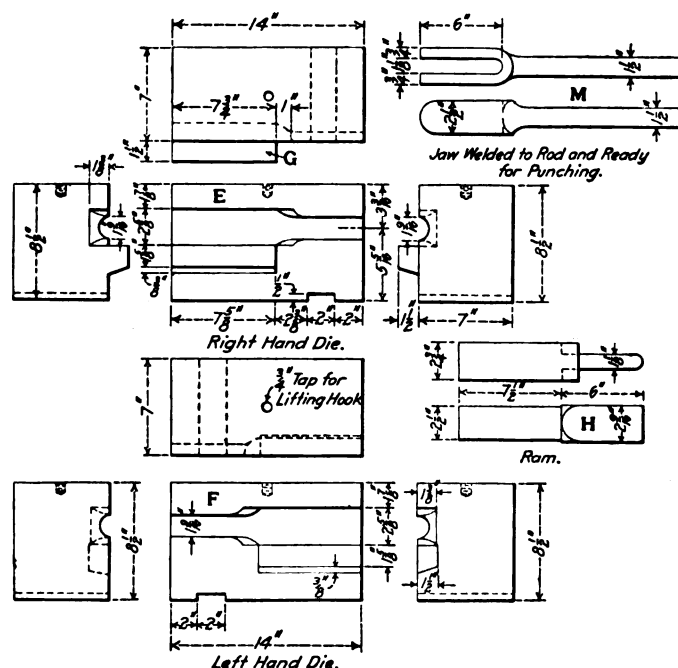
Dies for Welding Jaws to Brake Rods.
